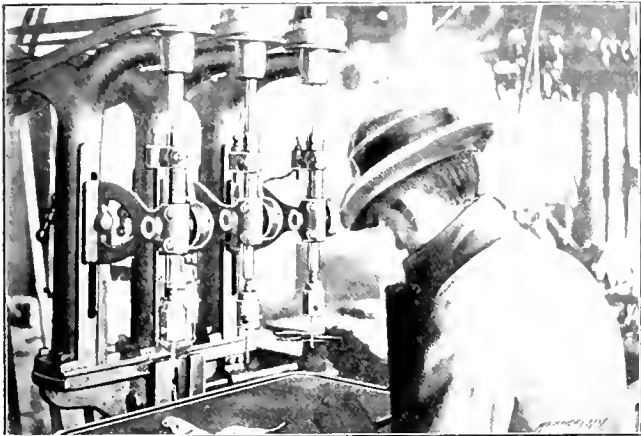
Hand Reaming the Handles in a Three-spindle Drill Press
